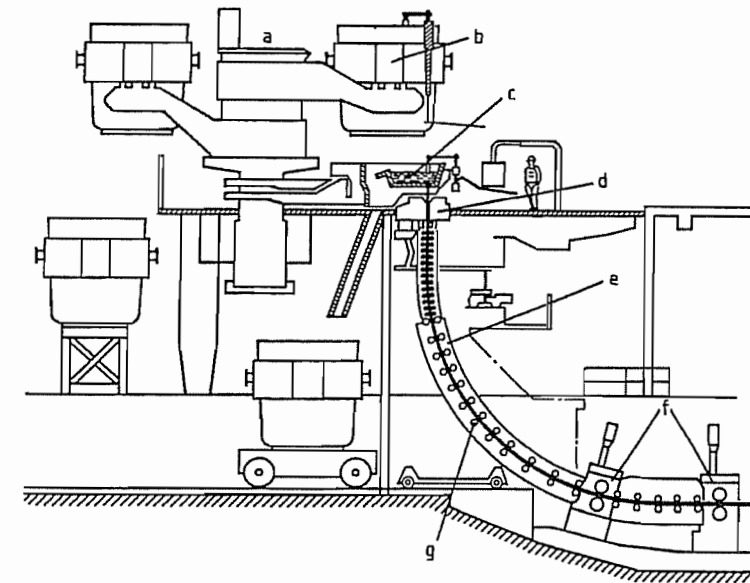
Blown caster with ladle turret: a) Ladle turret; b) Ladle; c) Tundish; d) Mold; e) Secondary cooling zone; f) Straightening and withdrawal; g) Guide rollers.
